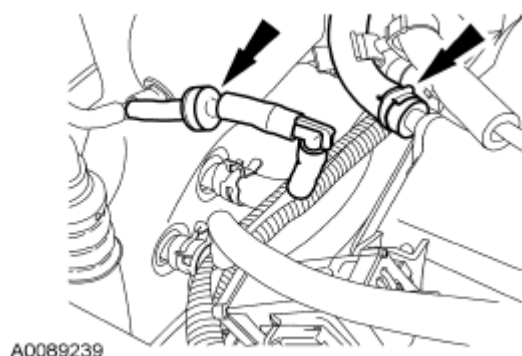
Locating Brake Booster Vacuum Tube Vacuum Reservoir Tube
